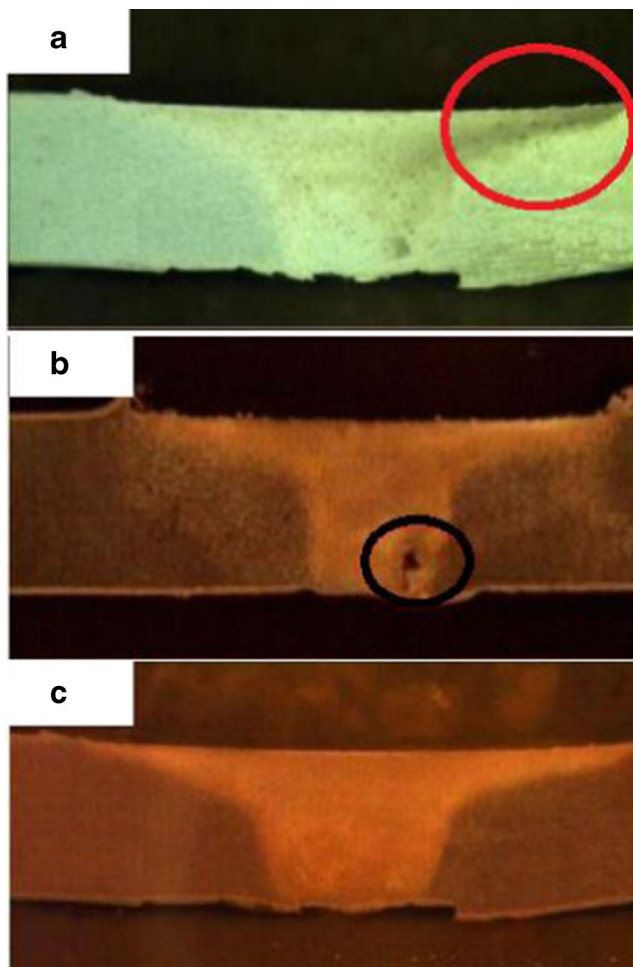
Macrostructure of FSP region at various welding speeds: a kissing bond defect at 40 mm/min; b tunnel and narrow weld line in 80 mm/min; c defect free at 60 mm/min
